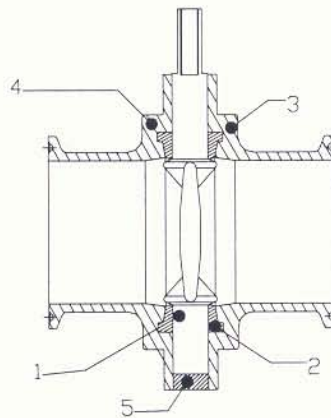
Sectional view of the butterfly valve. Specific parts relevant for the test are:
